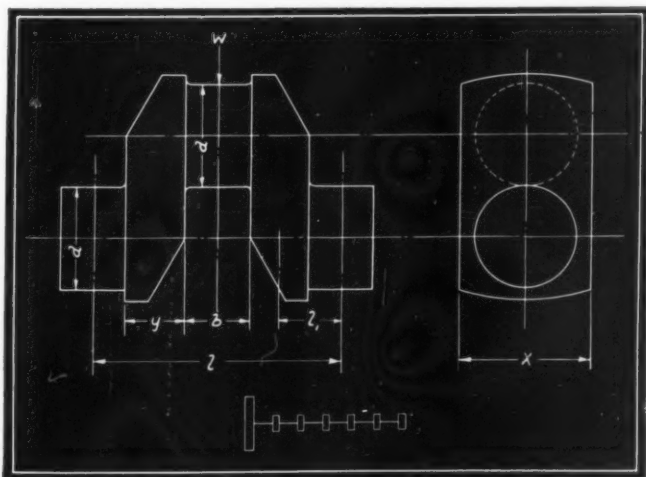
Section of crankshaft in which shaft and pin diameters are equal
